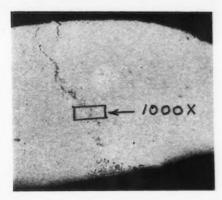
Unetched cross-section (25X) of a flanged butt joint where flux was used on the underside of the weld.
